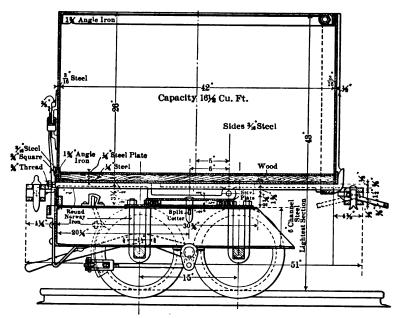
ELEVATION OF TUNNEL-CAR USED IN LARAMIE RIVER TUNNEL.
